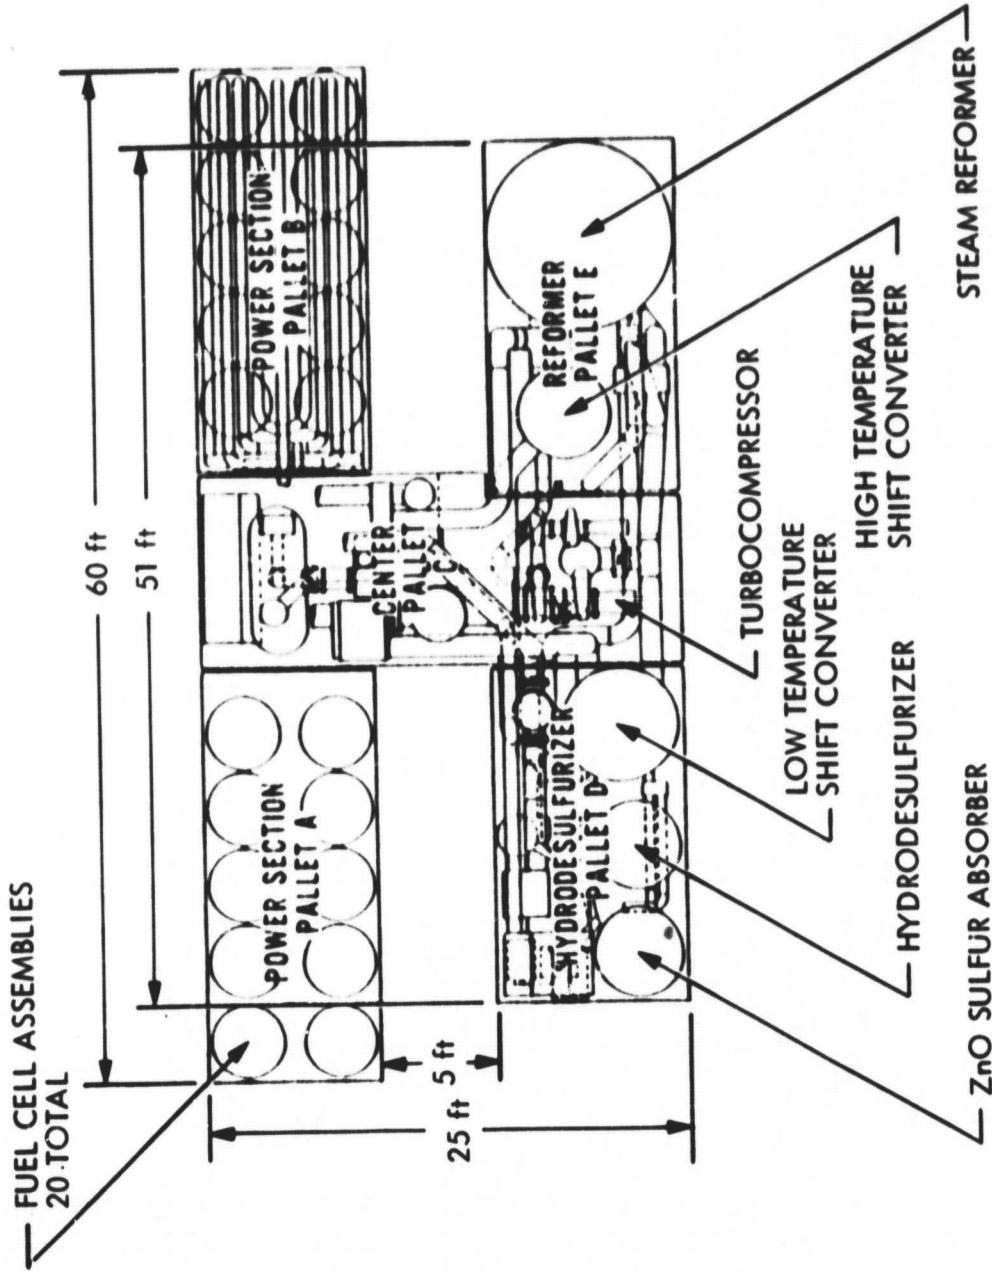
Module Demonstrator Pallet Definition of dc Module
